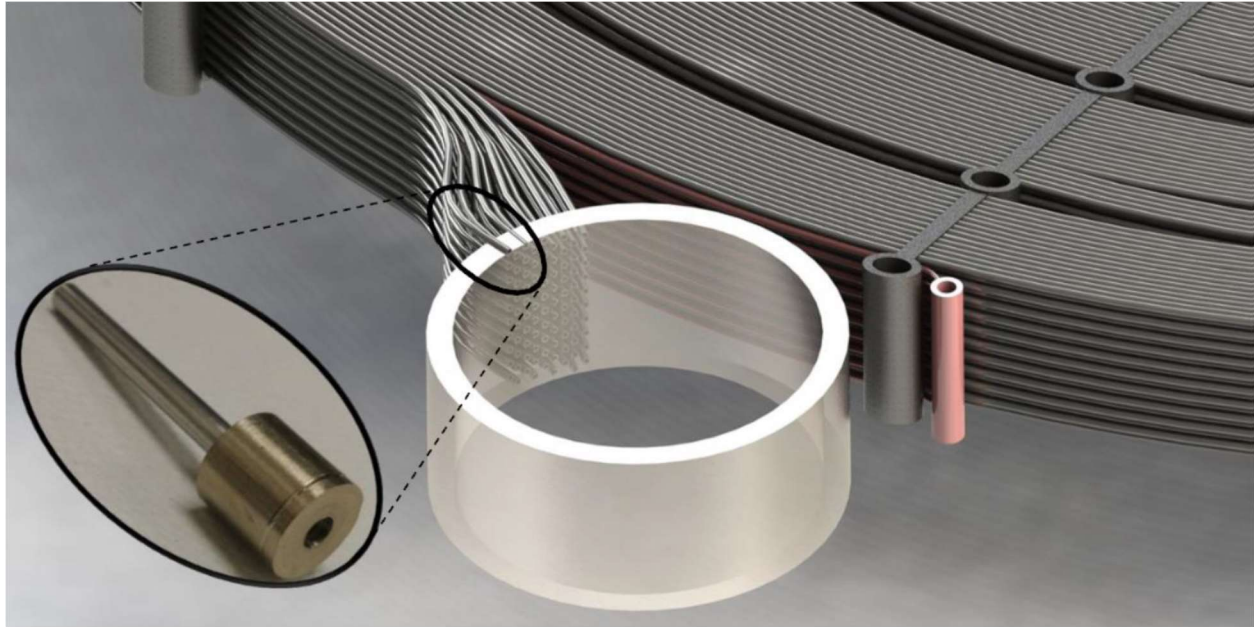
CTAH tube-to-tubesheet joint graphic with highlighted joint test sample.
